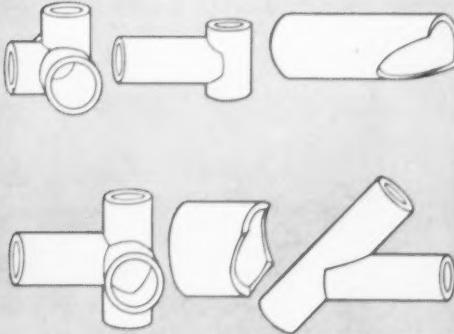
Drawing showing how tube-ends can be notched for producing such parts as tee joints, multiple joints, and angle joints.
